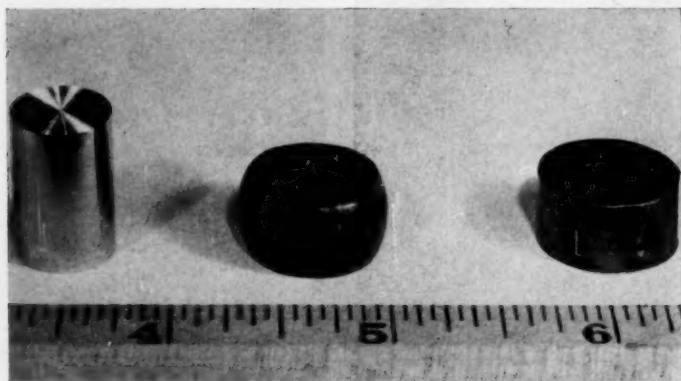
Depleted Uranium Compression Specimens. Left: prior to test; Center: after test with improper lubricant; Right: after test with proper lubricant.
